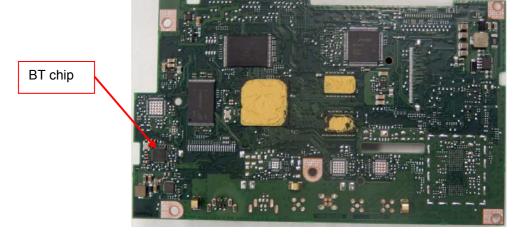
VP2 Refresh FP Mainboard PCB Bottom side with BT chip
